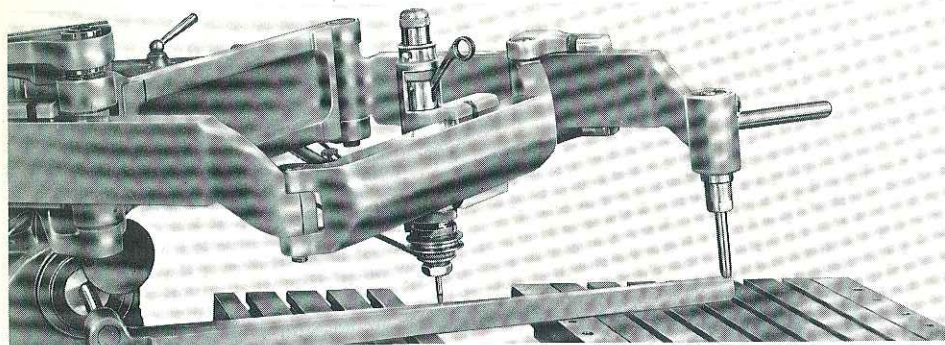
Aligning cutter and tracer pin with straightedge attachment
